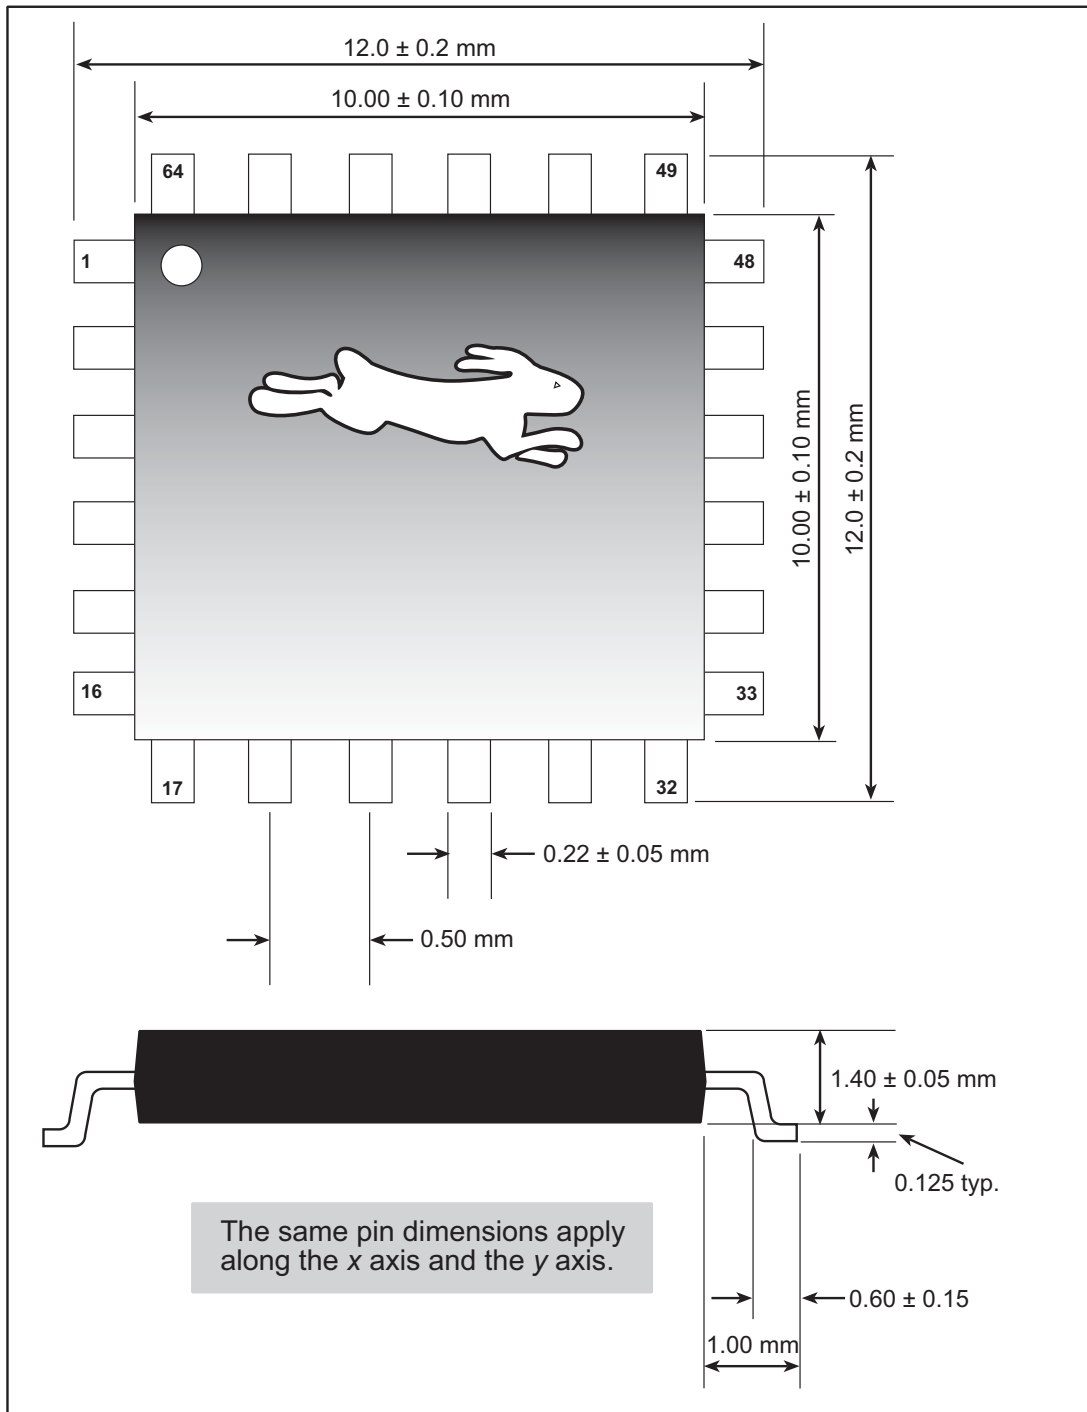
Mechanical Dimensions Rabbit RIO TQFP Package
